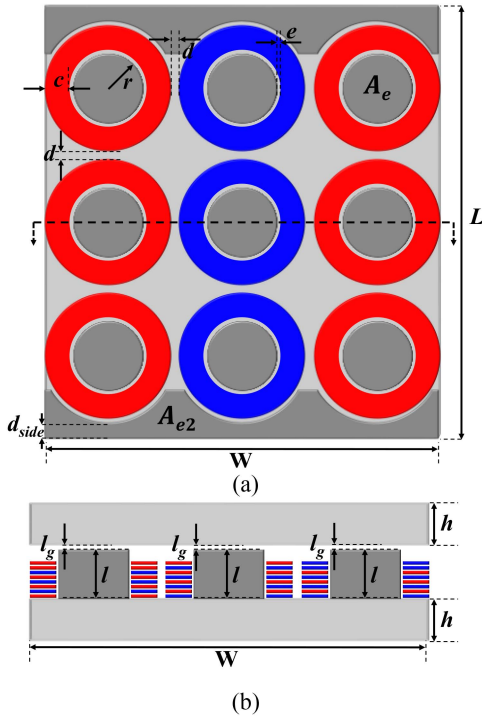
Transformer dimensions. (a) Top view. (b) Section view.
